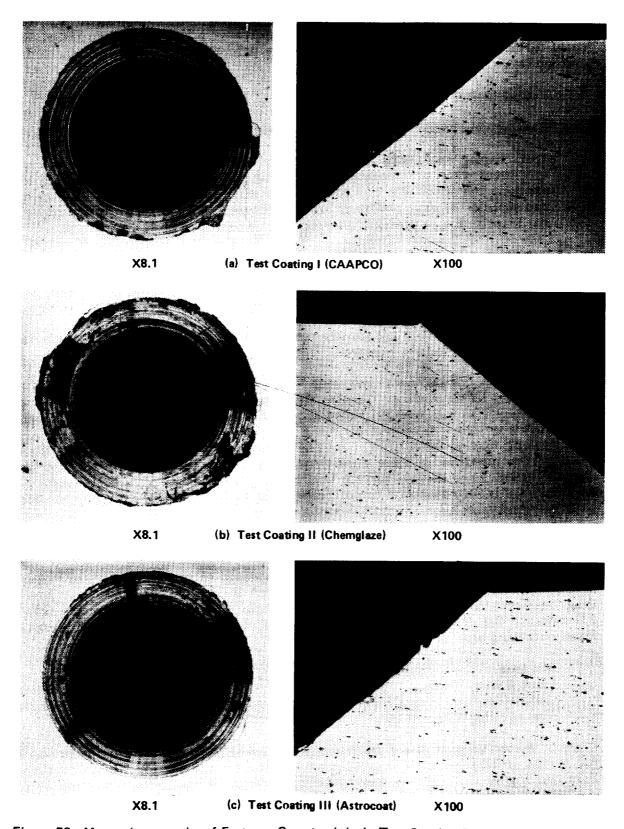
Macrophotographs of Fastener Countersinks in Test Coating Specimens—Dynamic Tests
